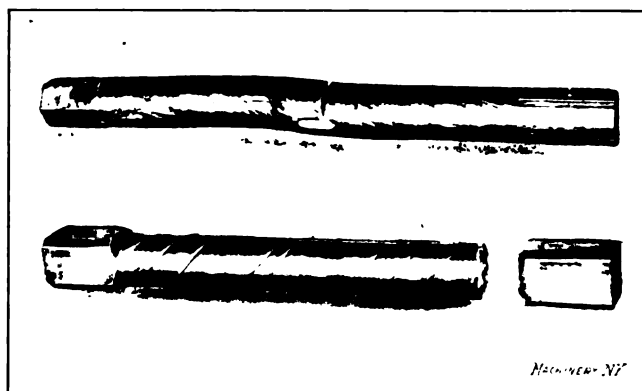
Condition of Shafts Broken in Tests shown in Fig. 46; the Gears were Uninjured
